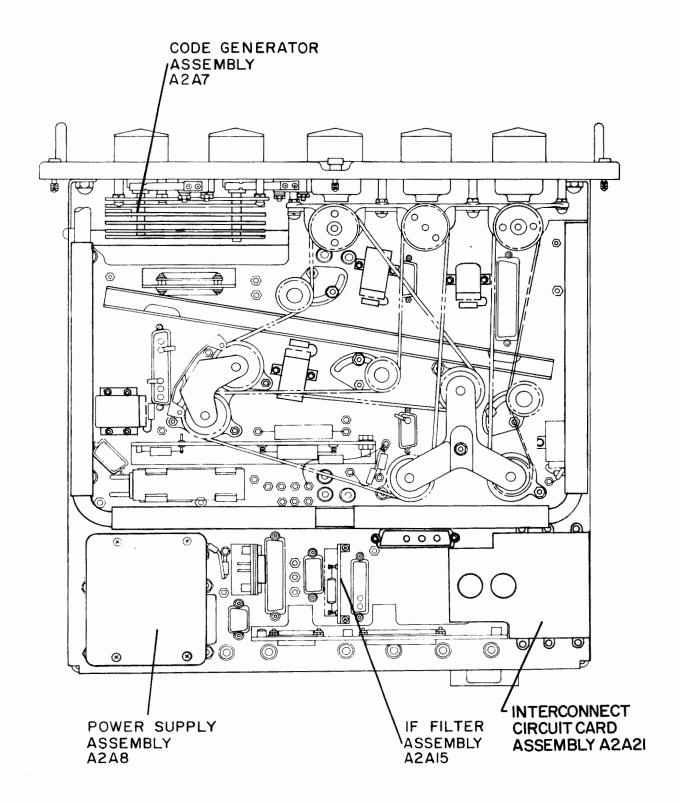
Radio Transmitter T-827H/URT, Bottom View, Case Removed
